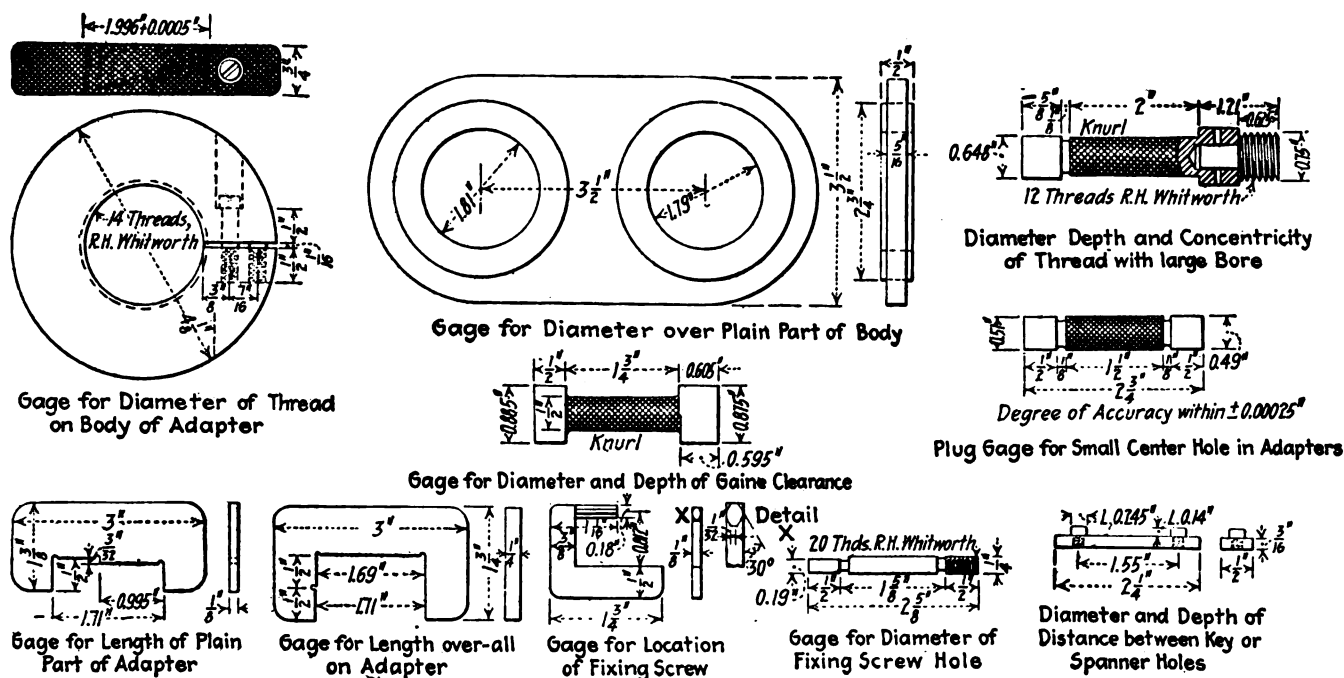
GAGES USED IN MANUFACTURING HIGH-EXPLOSIVE SHELL ADAPTERS
